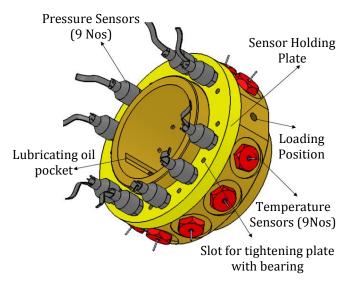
The Elliptical test bearing equipped with pressure and temperature Sensor.
